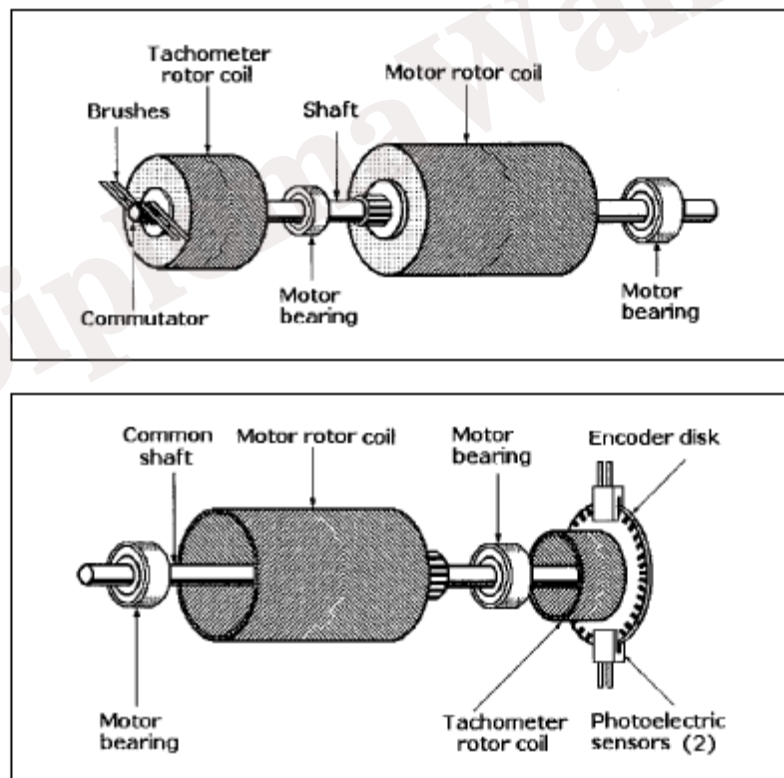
The rotors of the Dc motor and tachogenerator share a common shaft
